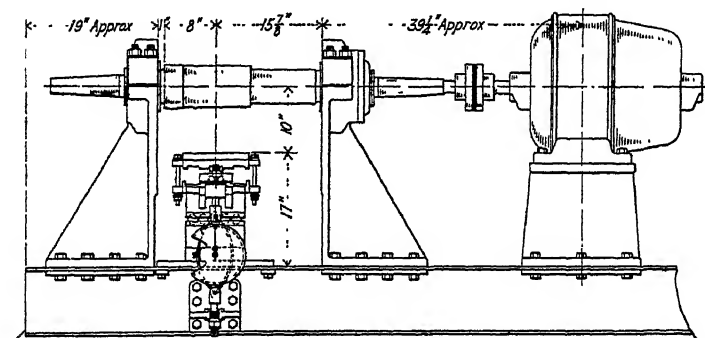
ARRANGEMENT OF BEARING TESTING MACHINE
